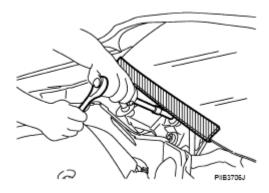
Identifying Windshield Precaution Courtesy of NISSAN MOTOR CO., U.S.A.
